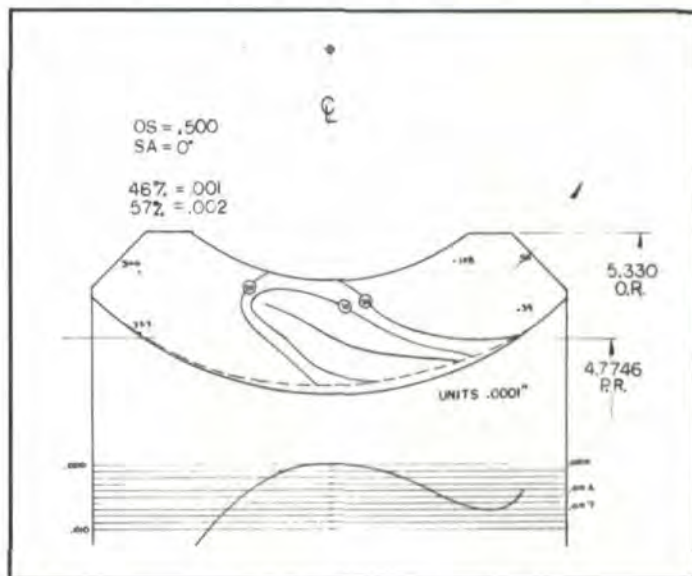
Map of one thread oversize hob. Seven thread hob, six thread worm.
